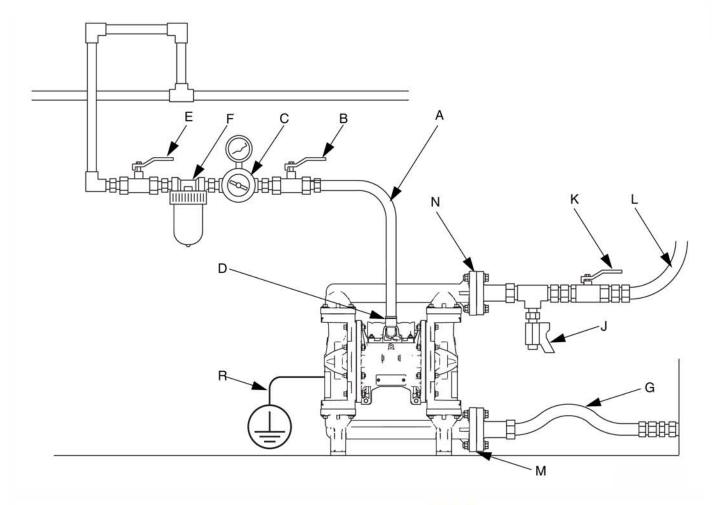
Typical floor-mount installation (polypropylene, 1050P, pump shown)
